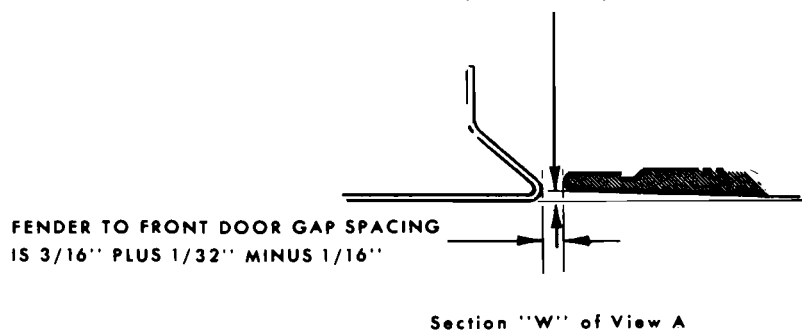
Specified Body Opening Clearance Tolerances - "X" Styles
